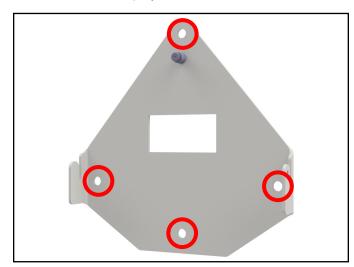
Mounting holes on the SmartLog Pro® mounting bracket
